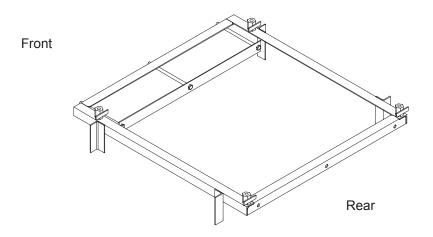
, Isometric View, Pad Frame Template, Single MiniBay (P/N 604-039-N1)
